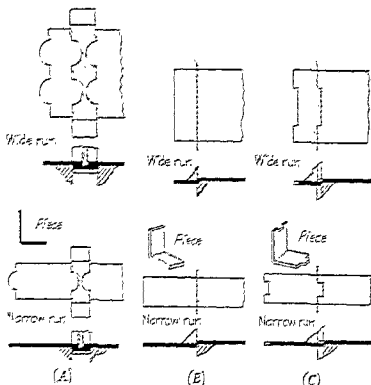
B. (A) Straight die; (B) and (C) shear dies.
